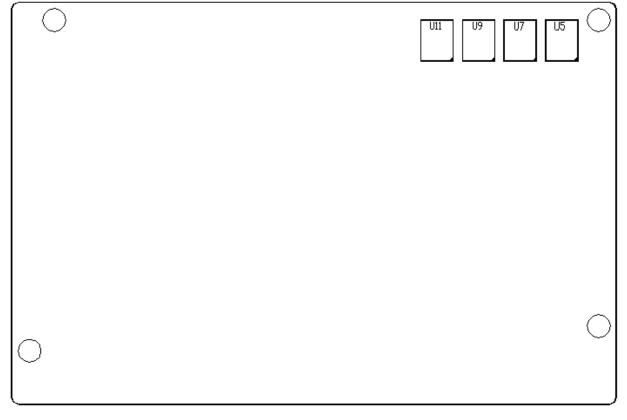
Jumpers and Connectors Location_ Board Bottom
